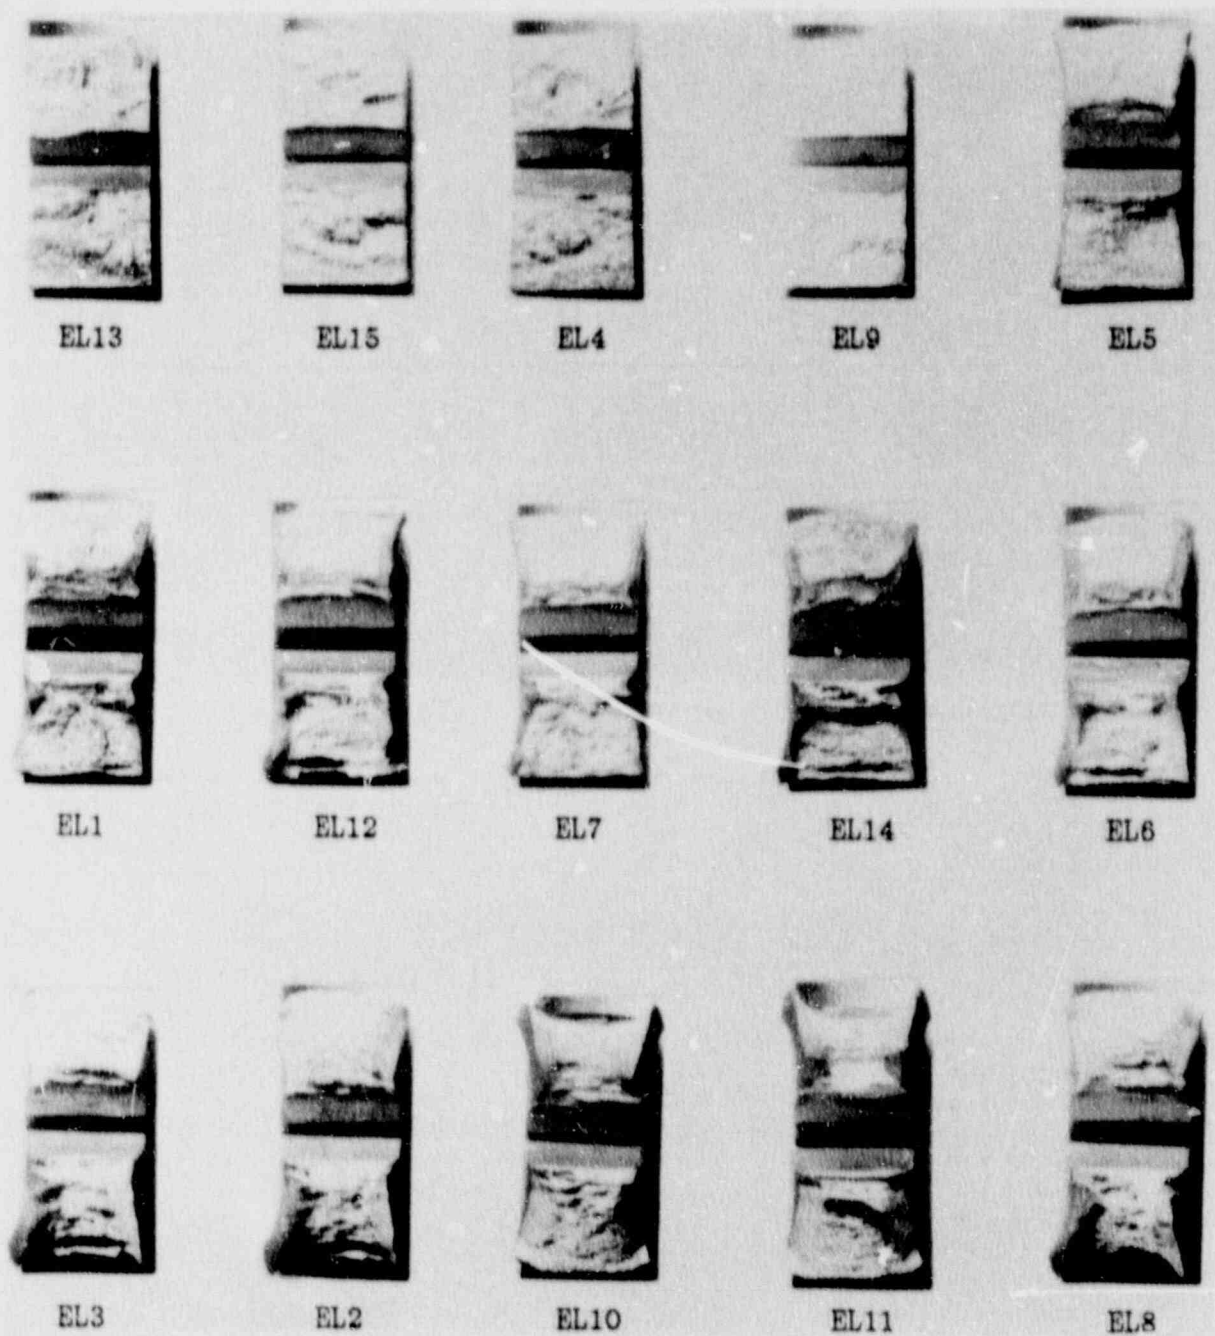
Charpy Impact Specimen Fracture Surfaces for Braidwood Unit 1 Reactor Vessel Shell Forging 48D867-1/49C813-1 (Tangential Orientation)
